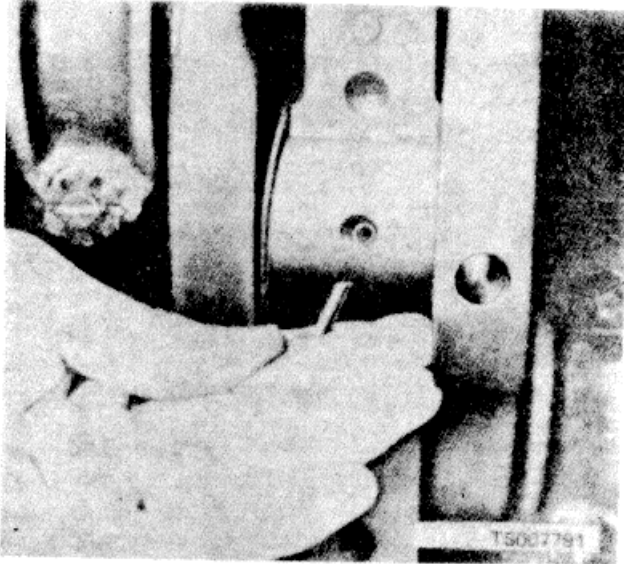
Removing Upper Bearing Shell with Angular Pin.
